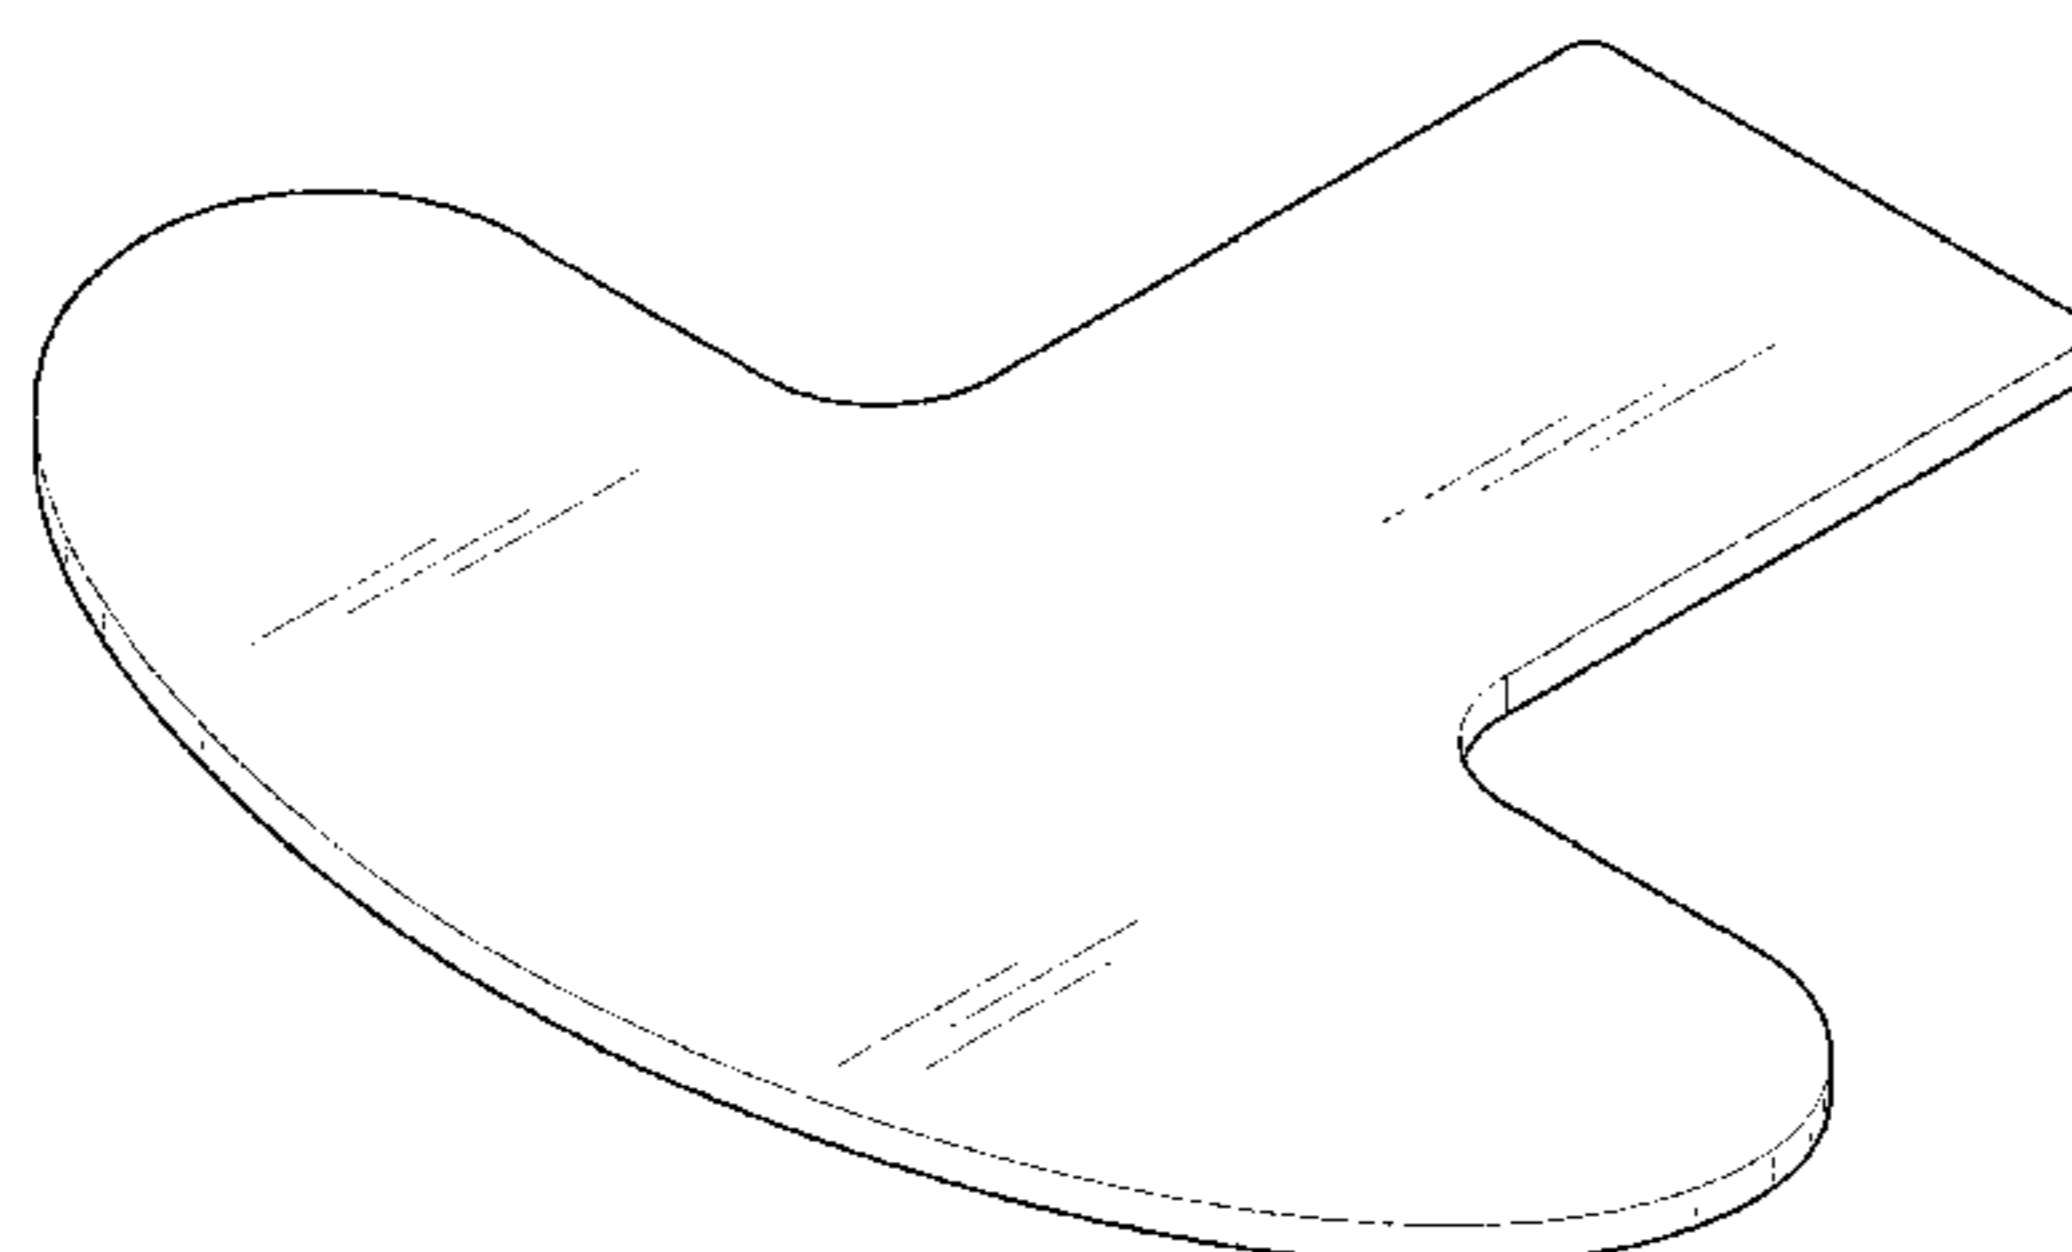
is a front view of the medical arm board according to FIG. 16;
